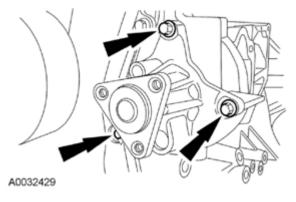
Locating Coolant Pump And Bolts Courtesy of FORD MOTOR CO.
